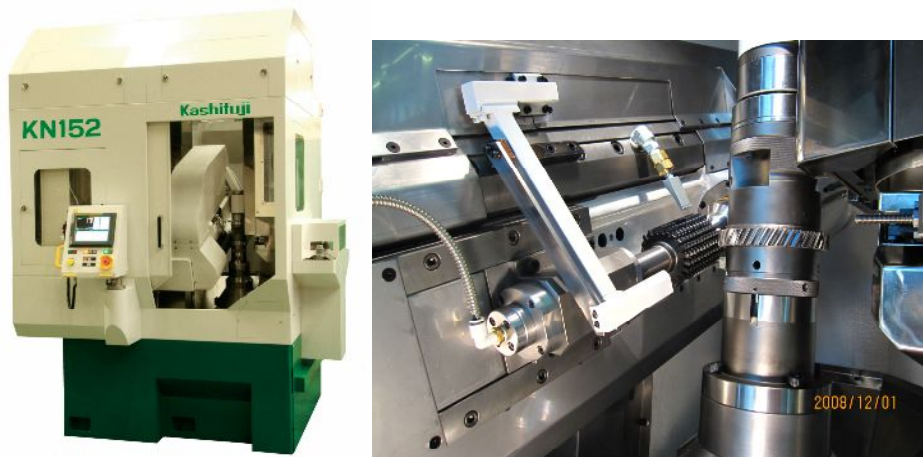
Improved workpiece runout accuracy with expanding arbor
